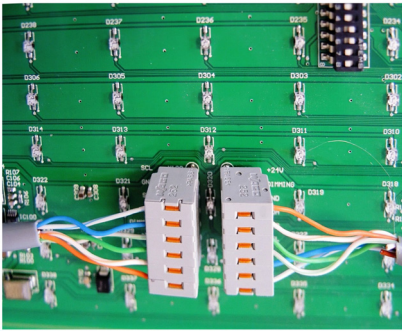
Zonal Display Front Cover Rear View - WAGO Terminal Blocks Plugged into PCB 6-Pin
